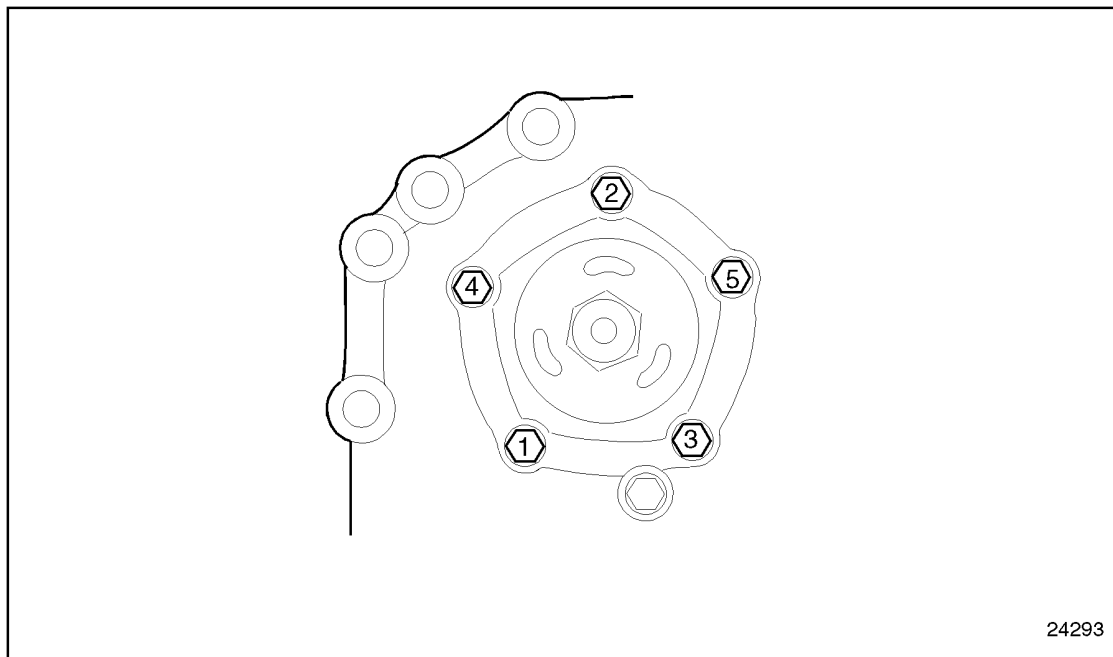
Accessory Drive Assembly Bolt Torque Sequence
